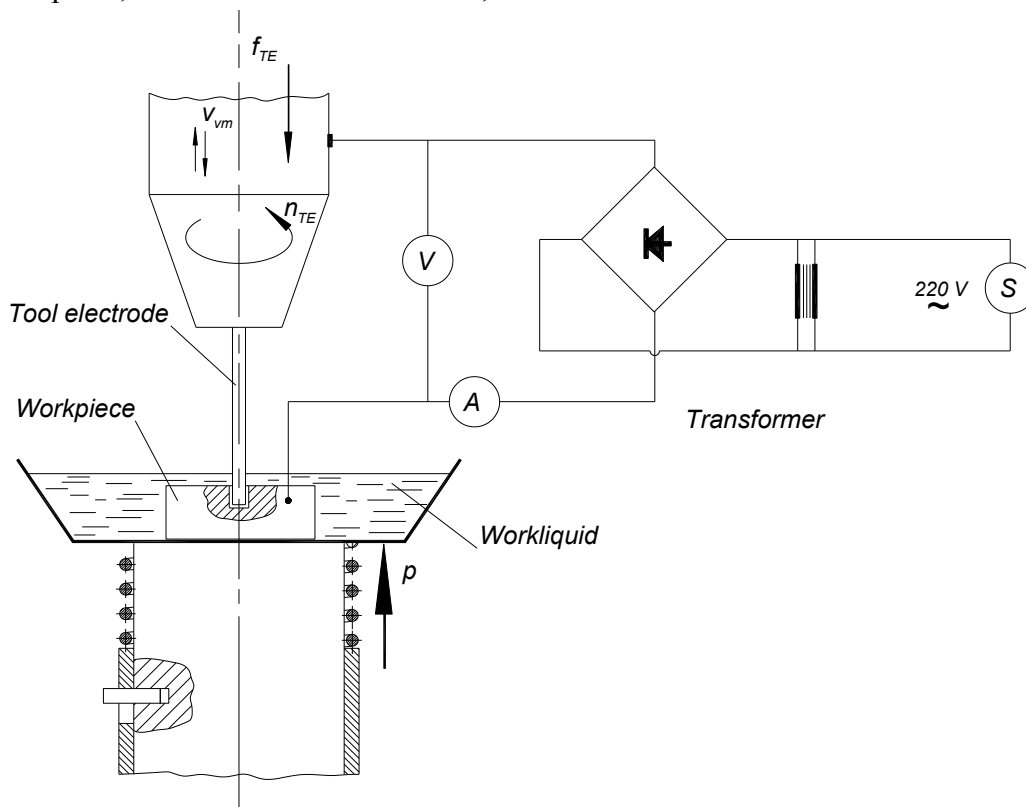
Machining scheme applicable for studying the electrochemical discharge drilling process
